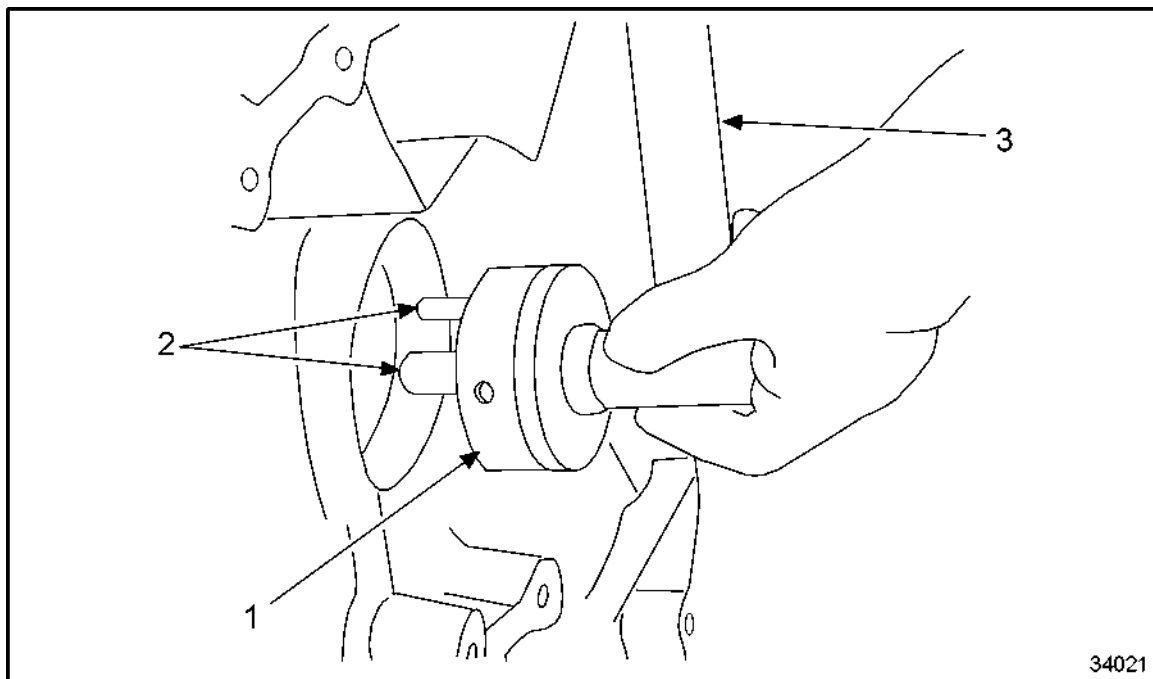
Removing Insertion Brass Drift from Assembly Tool
